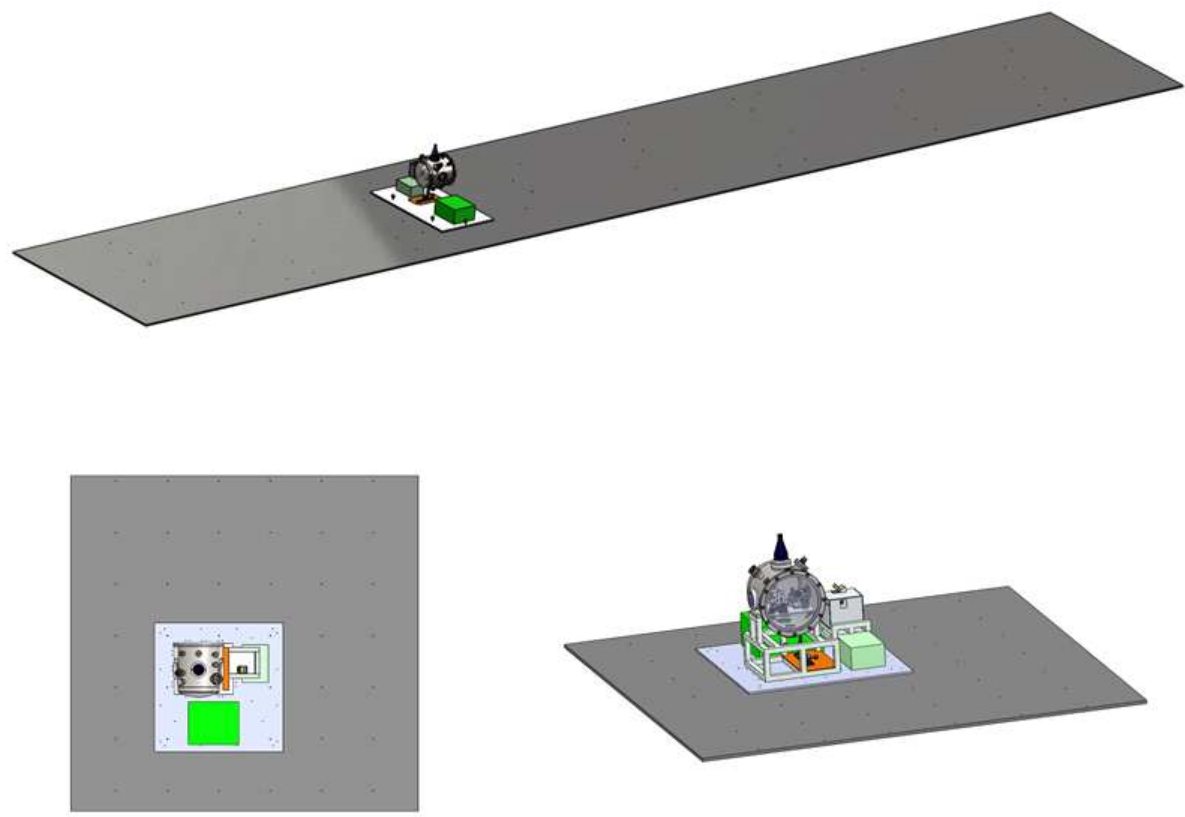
Configuration on flight Bottom - chamber arrangement and fixed
